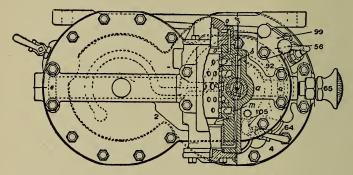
Horizontal Section of Reversing Valve Chamber.
